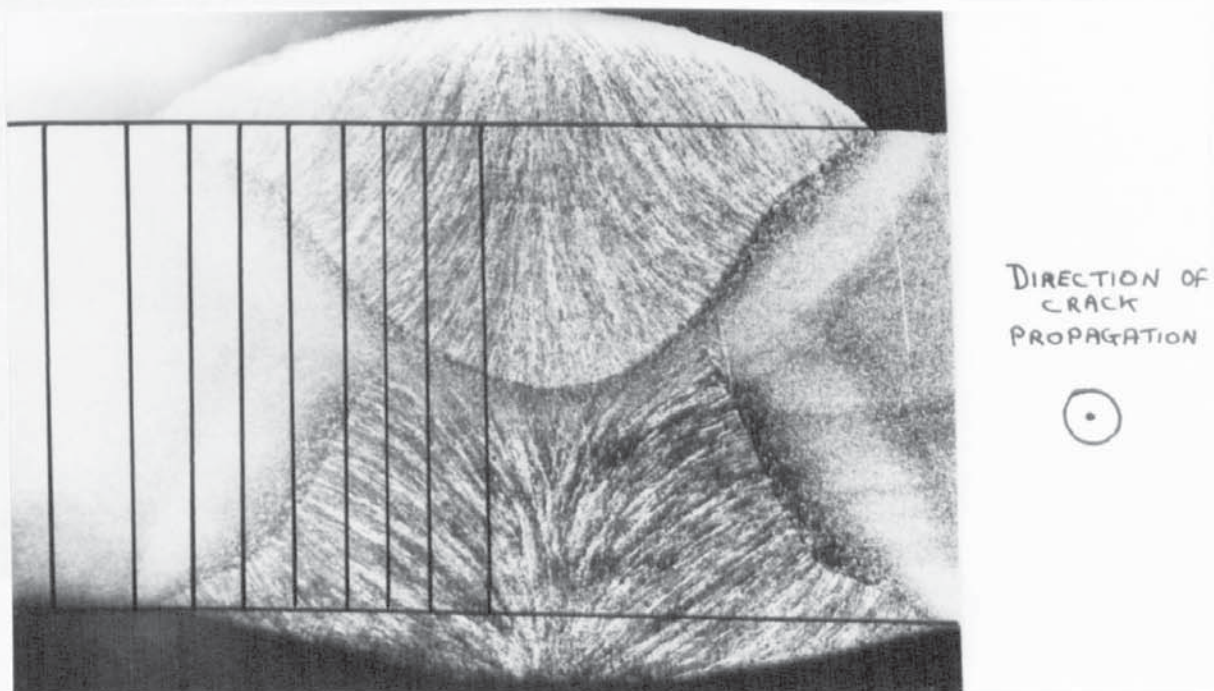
Positions of Notch Tip in Longitudinal Specimens
